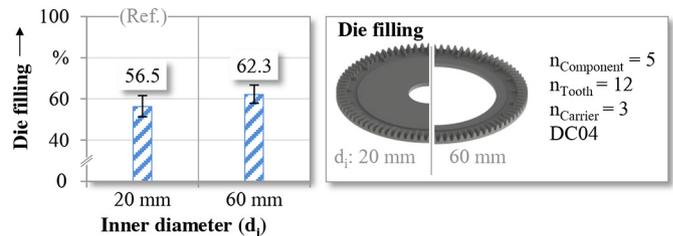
Effect of the workpiece geometry on die filling in the forward-extrusion forming experiment.
